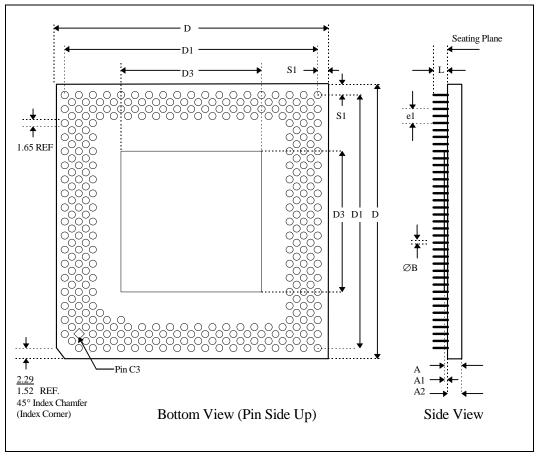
Mobile Pentium® Processor with MMX™ Technology PPGA Package Dimensions Bottom and Side View
